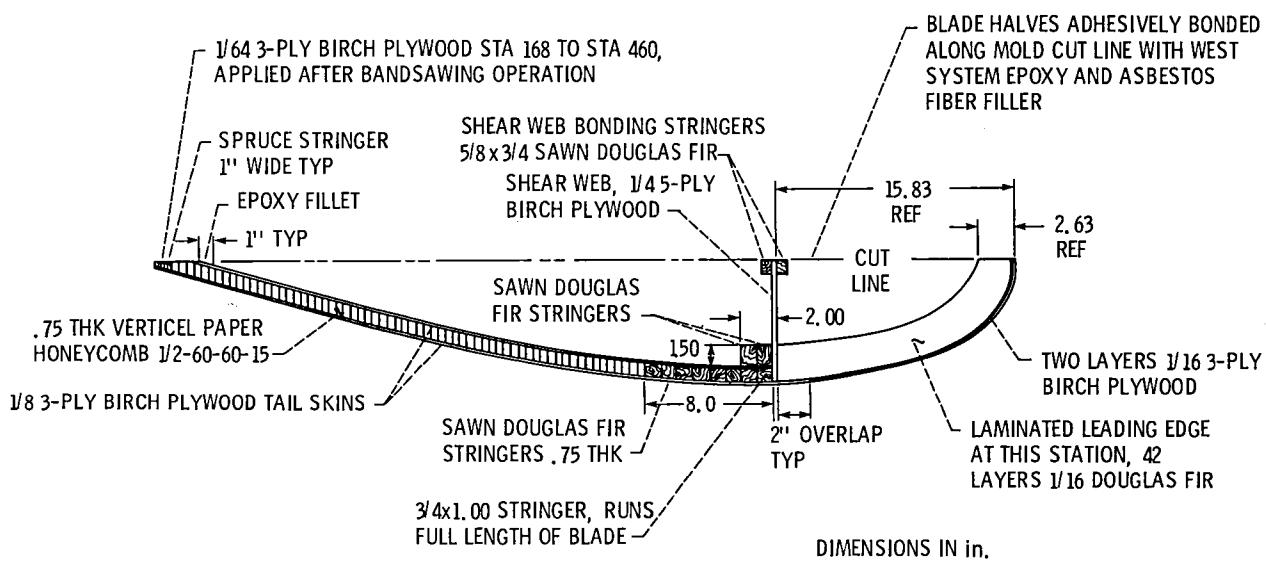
Details of blade construction, planform view of lower blade half, stations 50 to 168.
